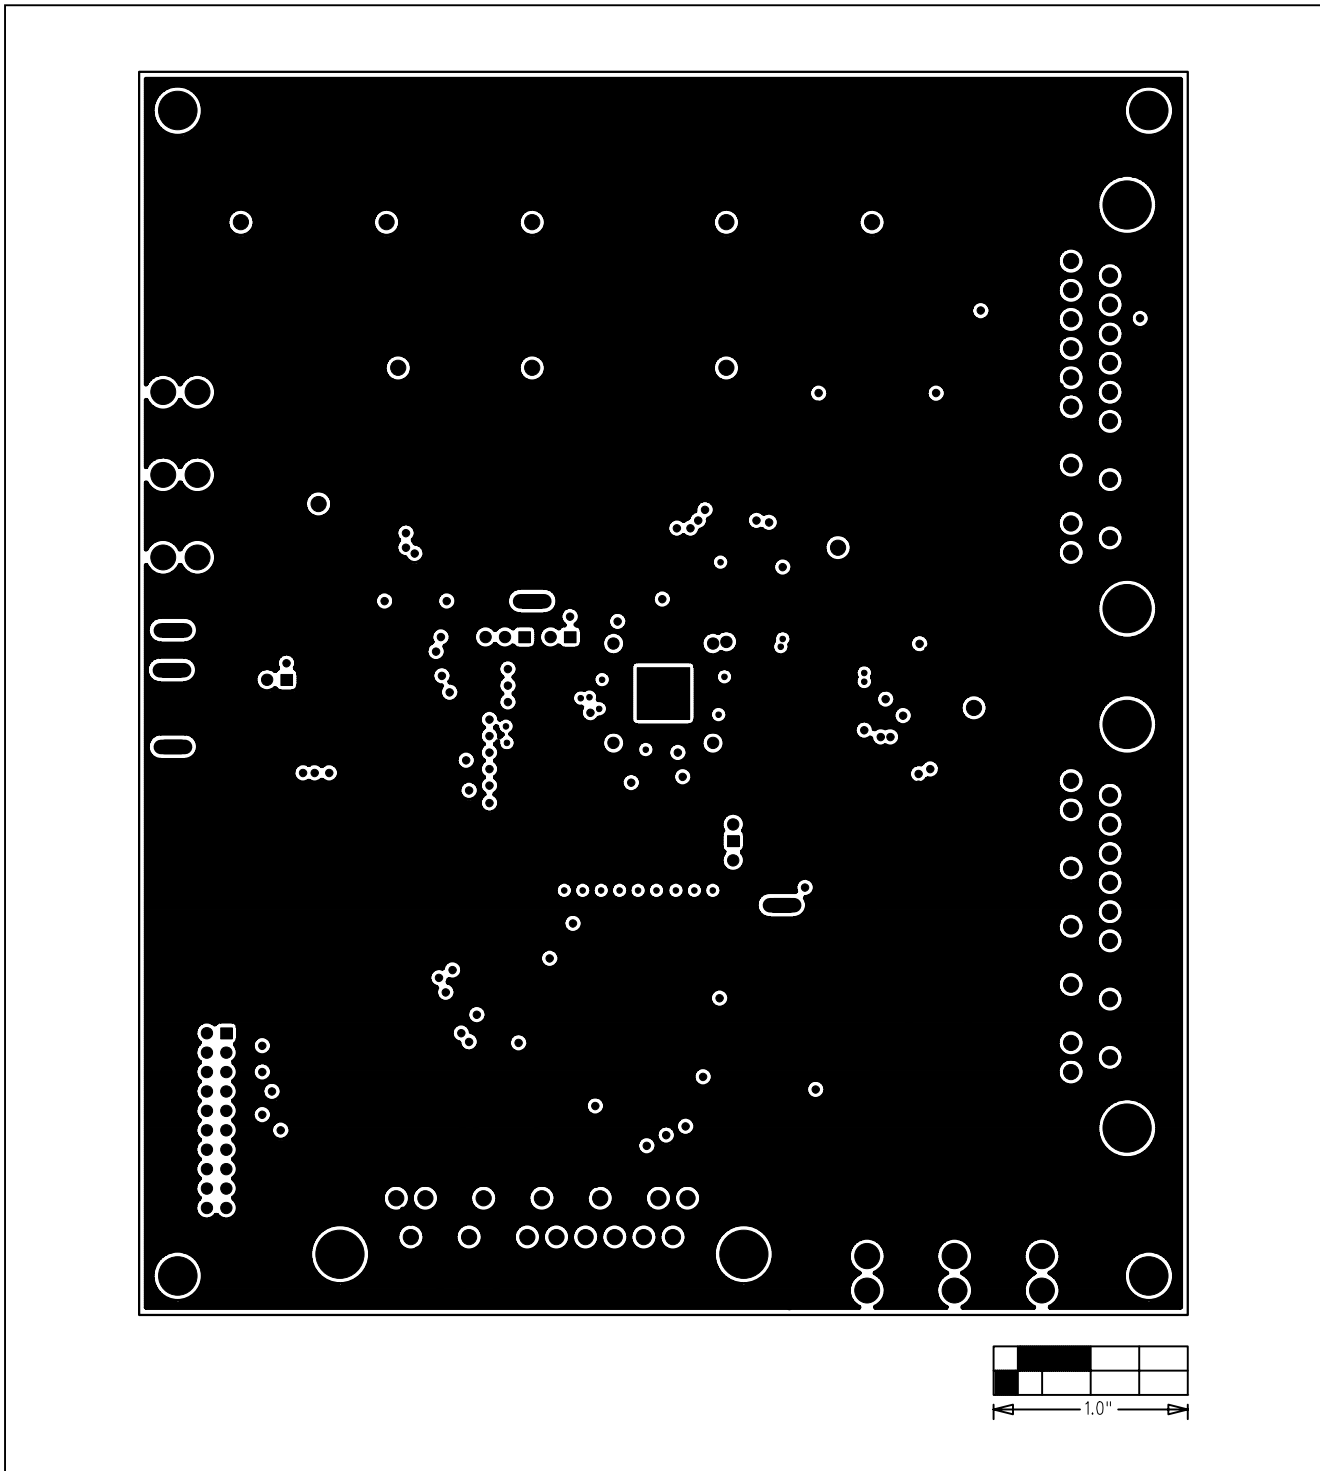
MAX4399 EV Kit PC Board Layout—Inner Layer 2
